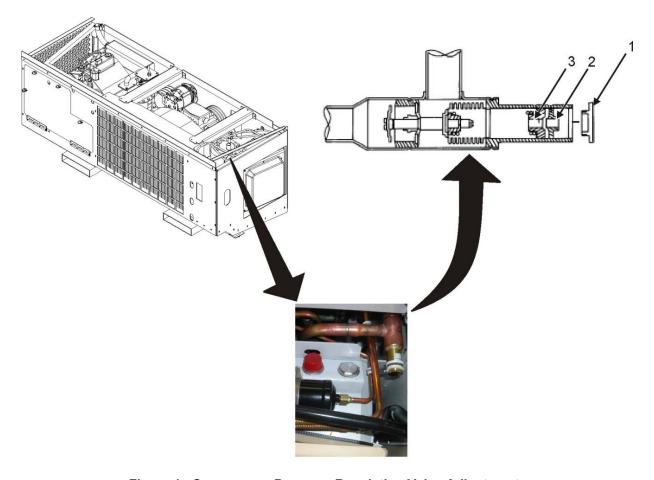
Compressor Pressure Regulating Valve Adjustment.
